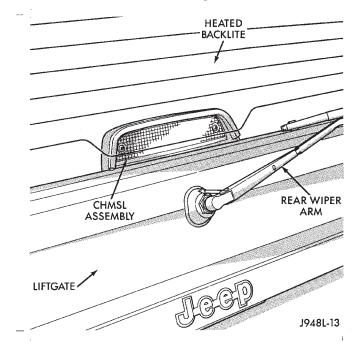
Center High Mounted Stop Lamp (CHMSL)
